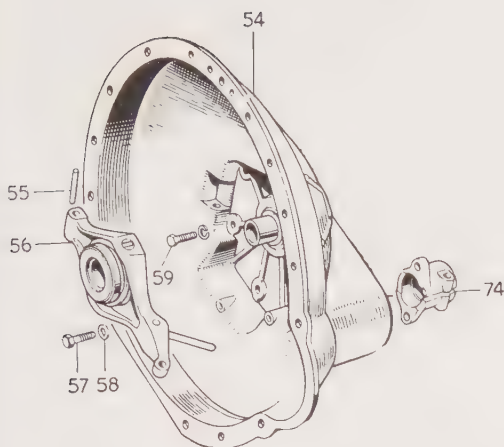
9 Clutch withdrawal lever and parts, 'Spitfire' cars.
